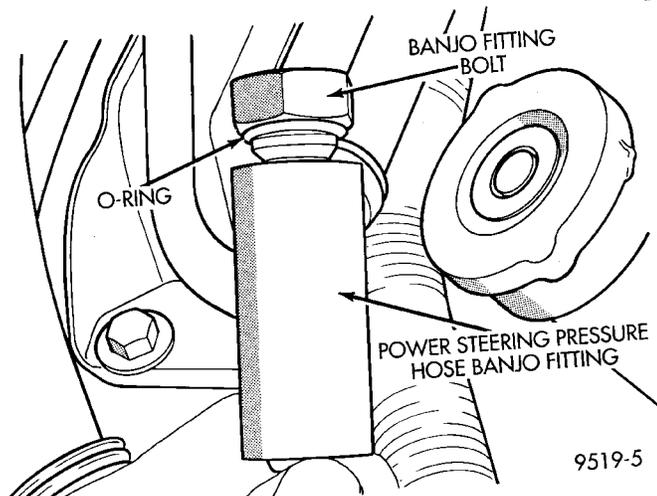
O-ring Installed On Banjo Fitting Bolt
